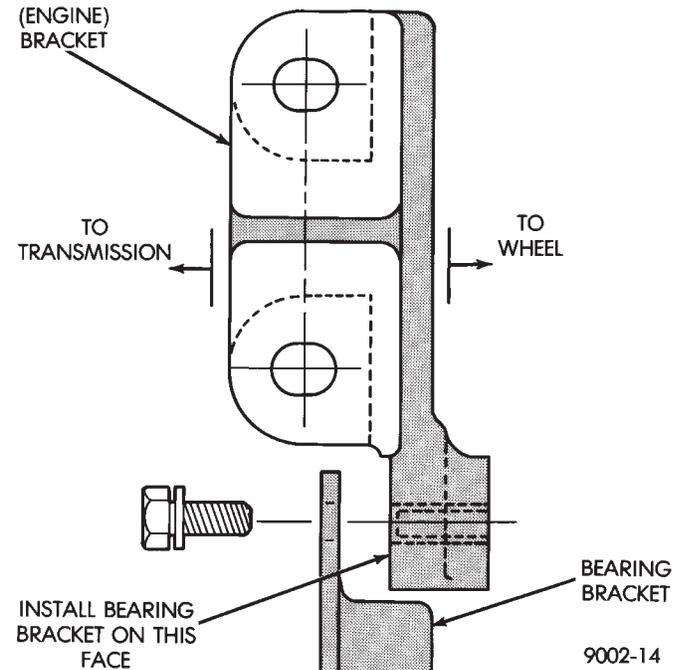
3.3L Intermediate Driveshaft Bearing Brackets, Position
